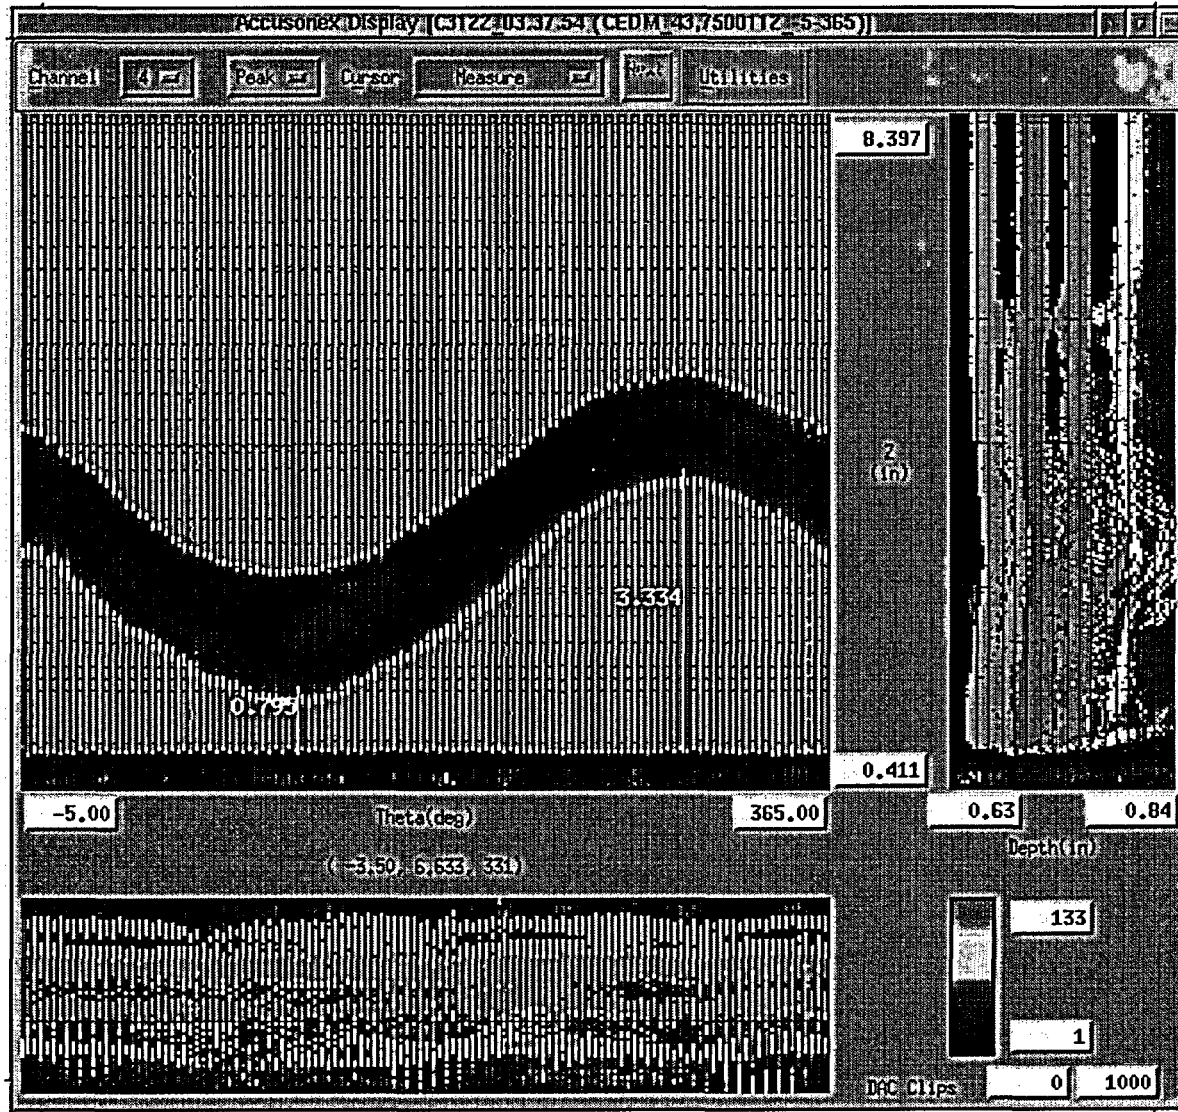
Typical UT "C" Scan of Nozzle 43 Showing Minimum and Maximum Coverage Area Below the Weld
